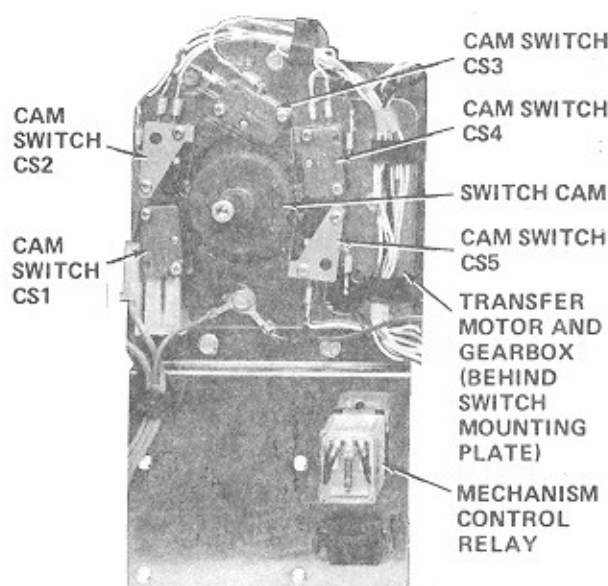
CAM SWITCH AND MOTOR ASSEMBLY COMPONENTS
